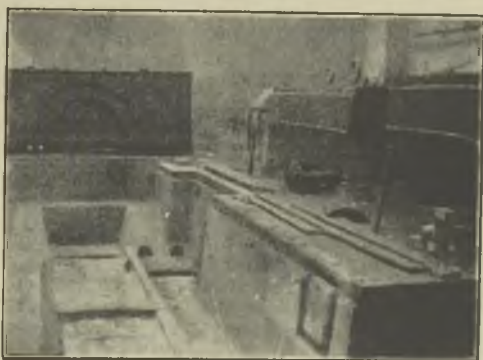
SHOWING BEDPLATE MOULD WITH CORES AND DRAWBACKS LIFTED OUT. IT HAS BEEN RAMMED BY THE SAND SLINGER AFTER MAKING THE UNDERSIDE OF THE PATTERN BY HAND.
